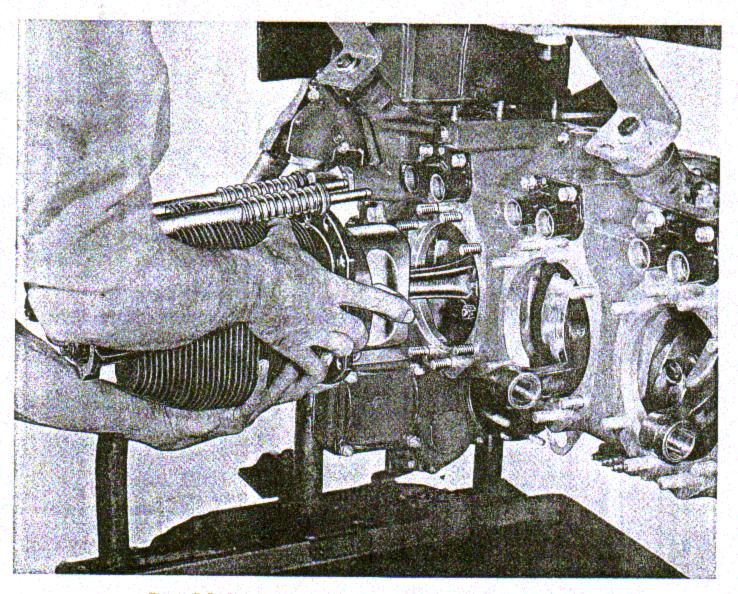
Installing Cylinder, Piston and Valve Train Assembly
